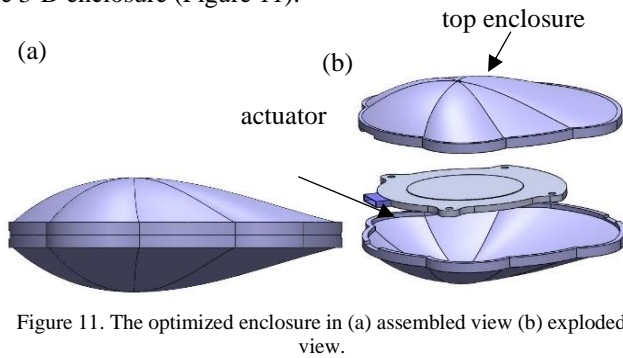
The optimized enclosure in (a) assembled view (b) exploded view.
